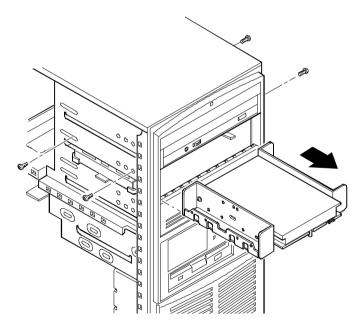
8 Removing a Device from the Upper Drive Bay Area
